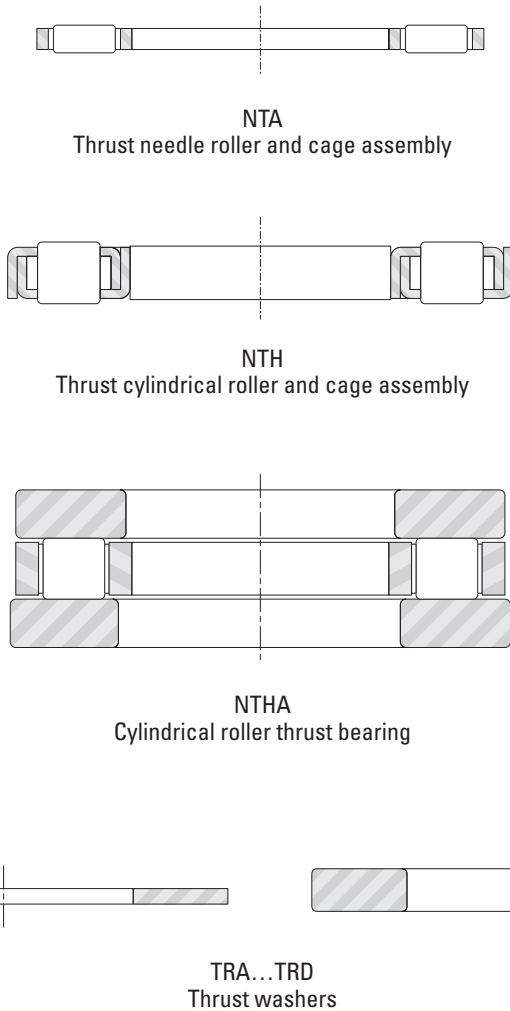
Types of inch series thrust assemblies, thrust bearings and thrust washers
